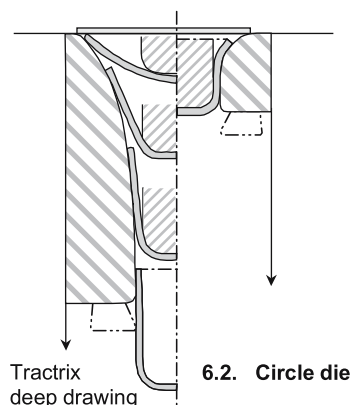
Tractrix and conventional deep drawing processes (without blankholder) [31, 32]
